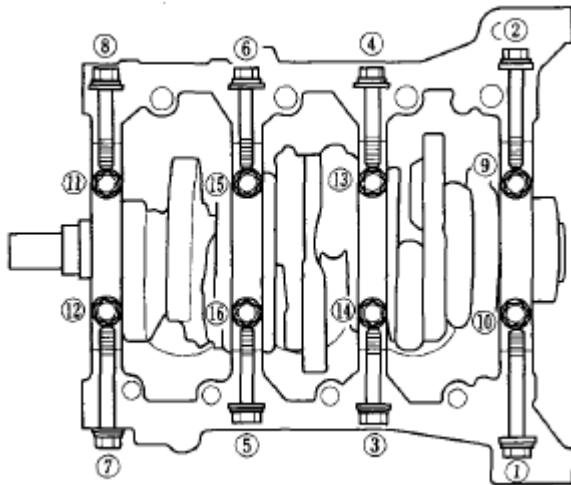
Identifying Bearing Cap Bolts And Side Bolts With Loosening Sequence
